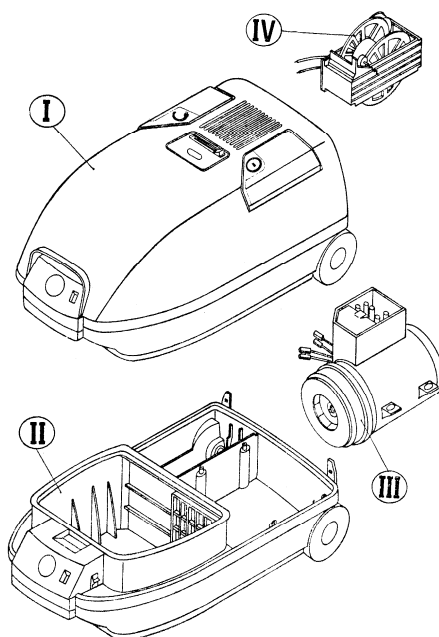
Basic assembly components of a vacuum cleaner [Instruction, 1998].
